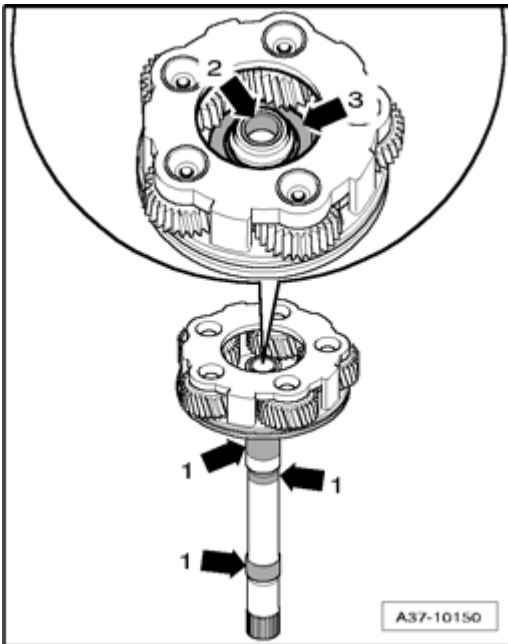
Contact Surfaces Of Brass Sleeve And Shaft
